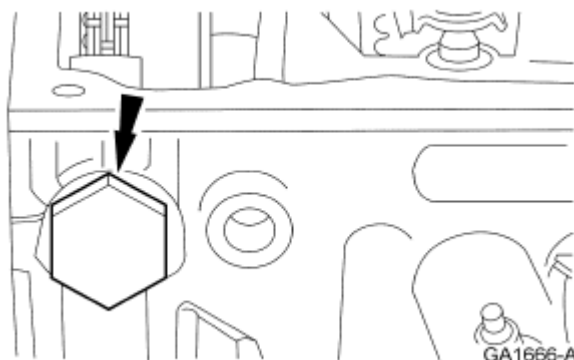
Identifying RH Camshaft Tensioner Bolt
